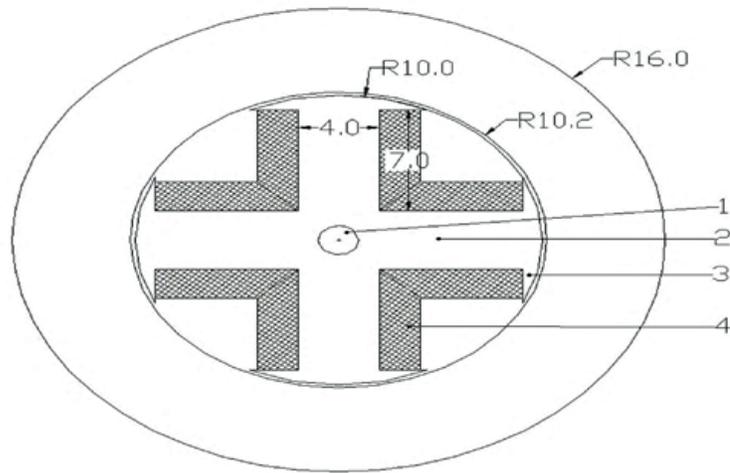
Generator section: 1- Shaft 2- Magnetic rotor core 3- Polar base 4- Wire [\[10\]](#)
